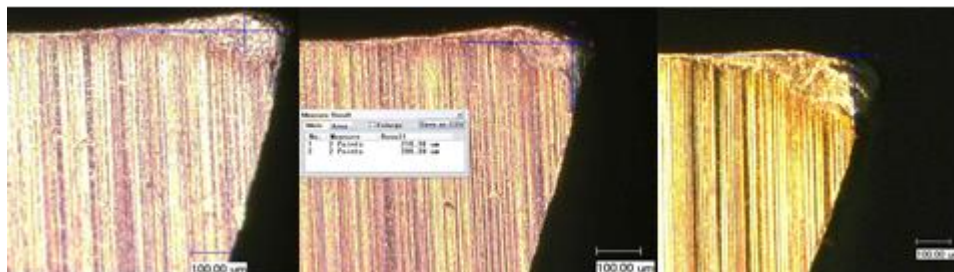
Tool flank wear left to right 0.1 mm, 0.2 mm, and 0.3 mm.
